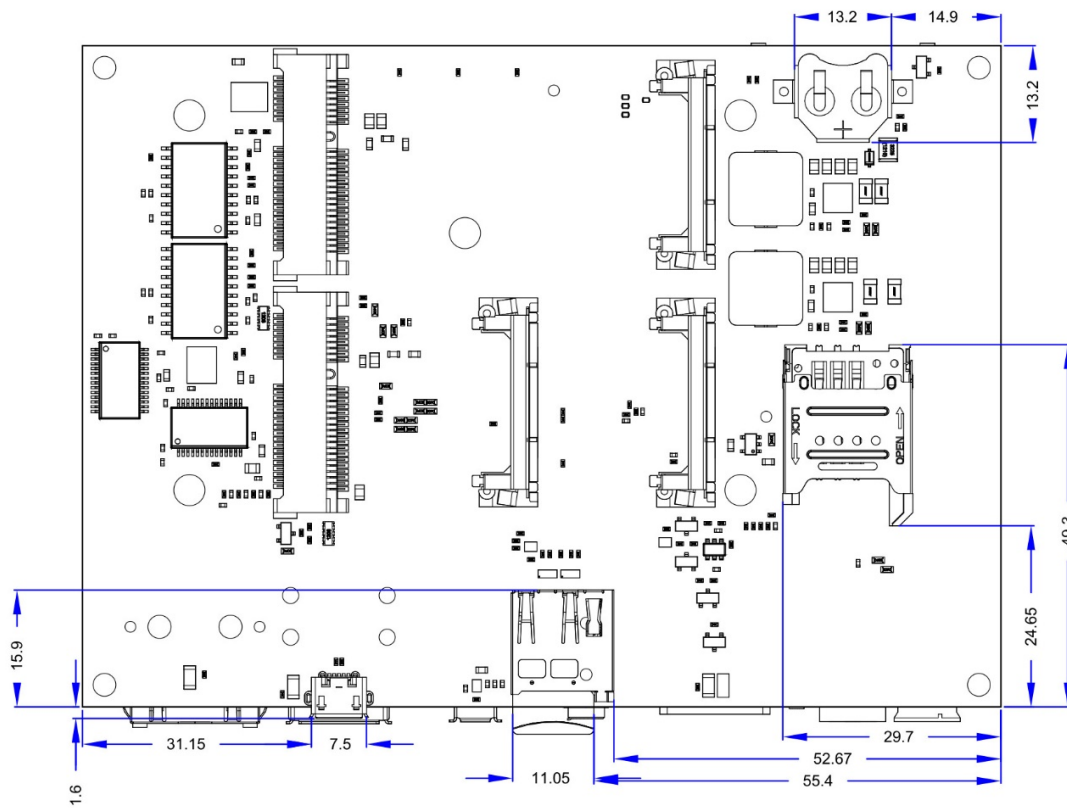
Ixora Carrier Board dimensions (in millimeters) – bottom side (bottom view)
